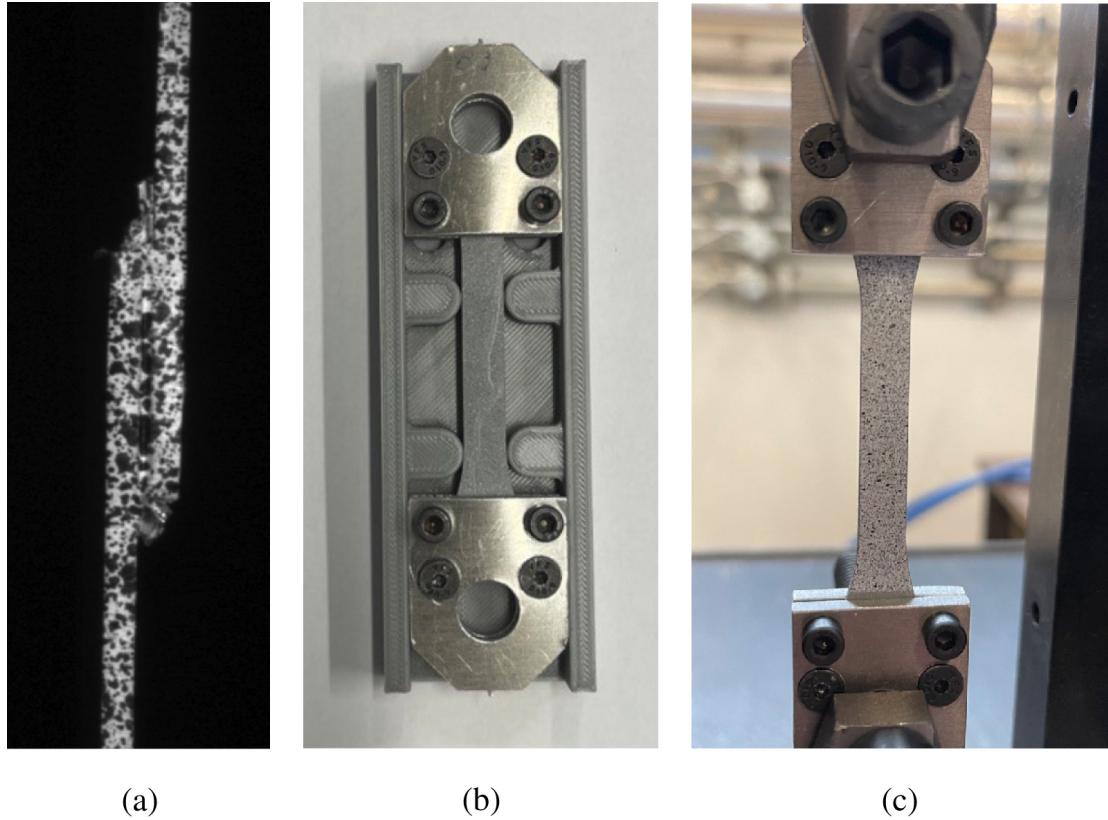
Mechanical testing: (a) shear testing on SLJ assembly, (b) device for bulk specimen alignment, (c) tensile test on bulk adhesive.
